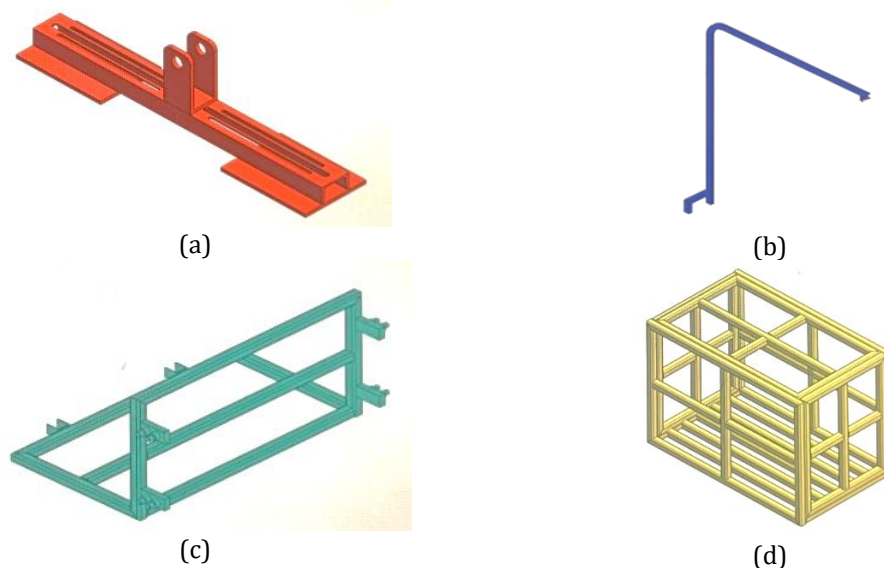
Components of the proposed portable mini ladder hoist: (a) Fit plate used for component connection and reinforcement, (b) Main frame supporting the lifting structure, (c) Frame stand providing structural stability, and (d) Goods bin used for load handling during lifting operations.
